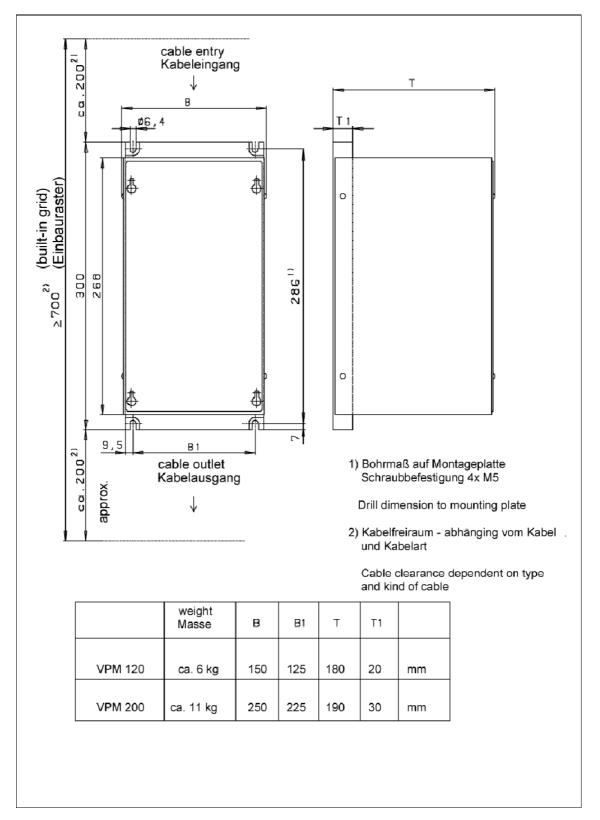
VPM 120 / VPM 200, dimension drawing
